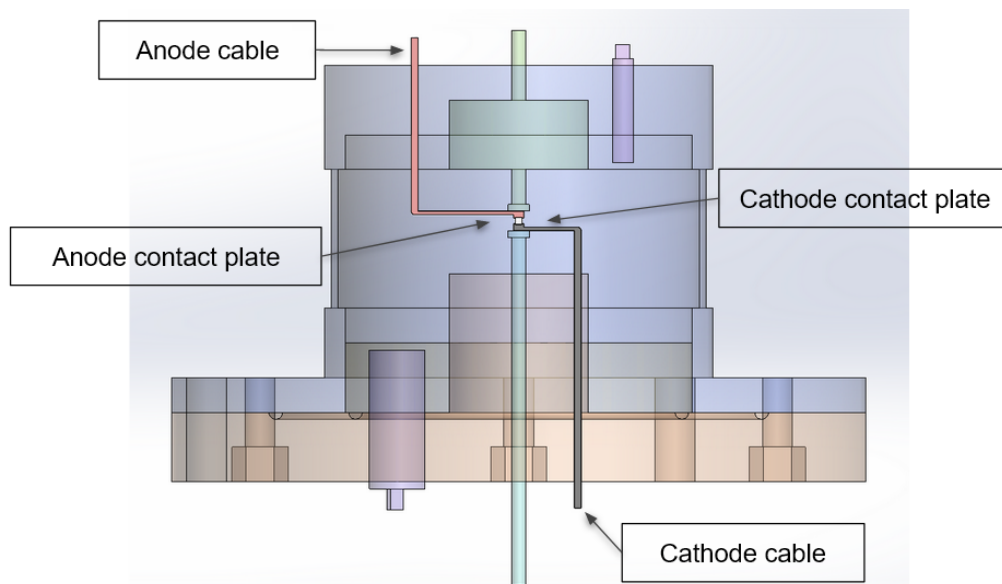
Electrical application subsystem CAD model, in a cross-sectional view. Anode cable from the top of the container subassembly soldered to the anode contact plate, shown in red. Cathode cable from the bottom of the container subassembly soldered to the cathode contact plate, shown in black. Electrical current flows through the cell sample from the anode plate to the cathode plate.
